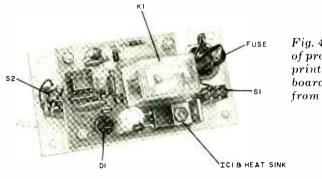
Photo of prototype printed circuit board removed from enclosure.
